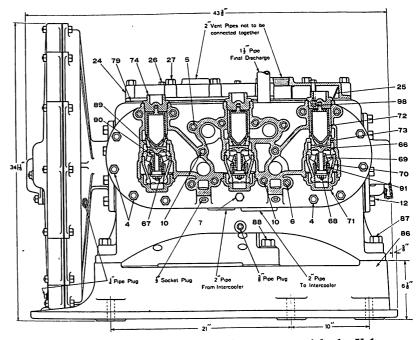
End View of the XC-75 Compressor with the Valves in Section
